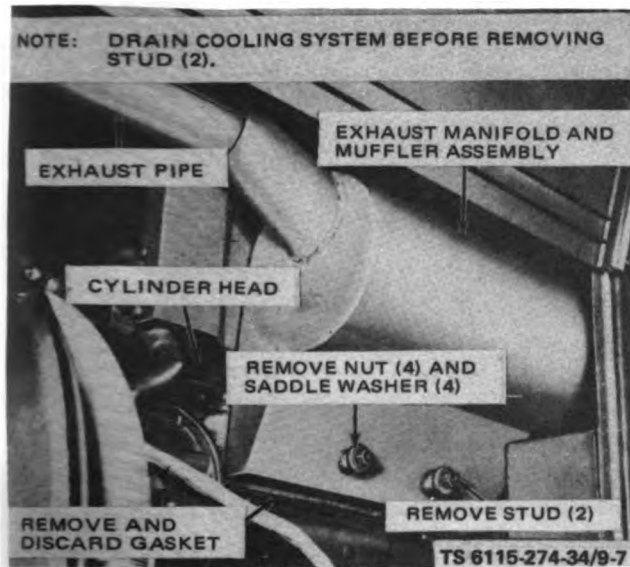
Exhaust Manifold and Muffler Assembly and Exhaust Pipe, Removal and Installation
